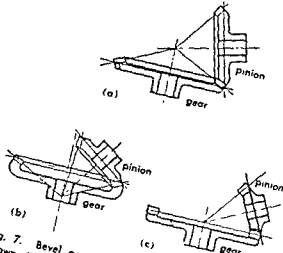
Bevel gears. (a) External. (b) Internal (c) Crown. (From G. L. Guillet and A. H. Church, *Kinematics of Machines*, 5th ed., Wiley, 1950)
